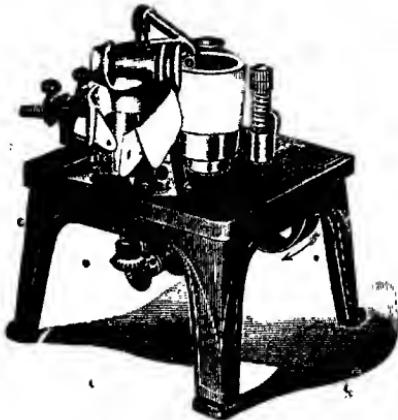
“HEIM” AUTOMATIC SHAPING MACHINE.
